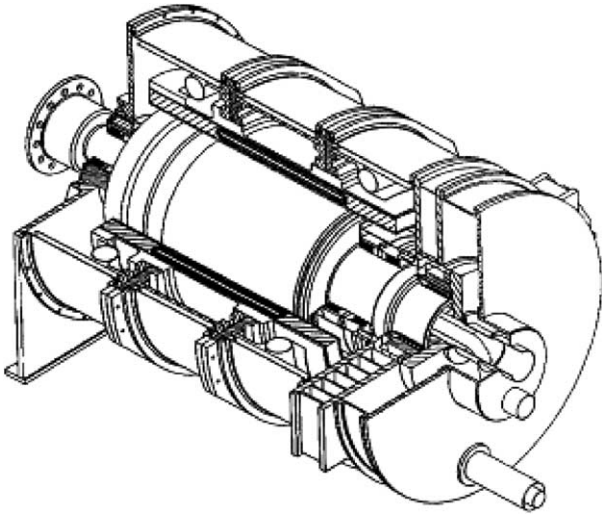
One Megawatt alternator at 20 K with BSCCO windings, courtesy of Long Electromagnetics.
